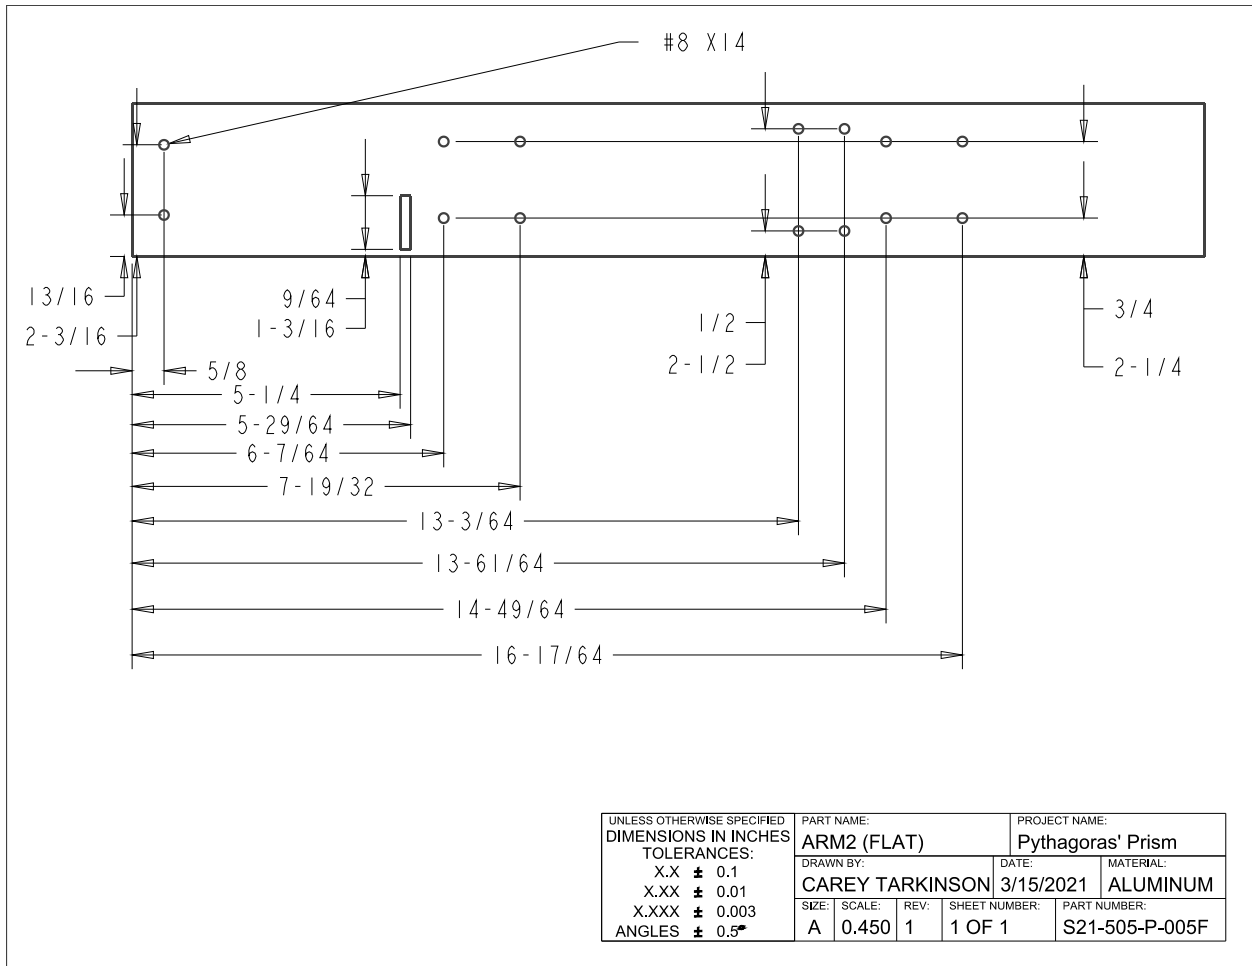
Engineering drawing of other passive arm with dimensions for machining.
